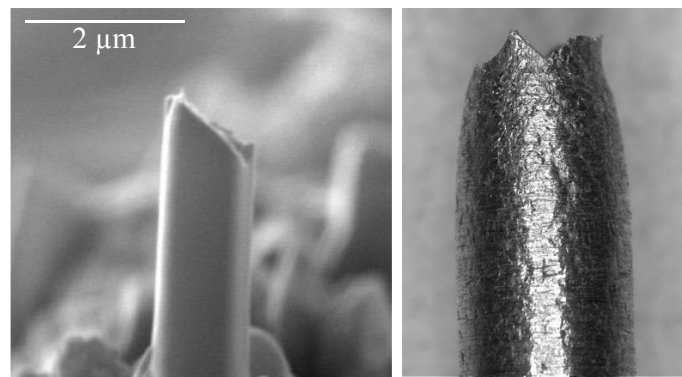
A fracture surface of a micro-tensile specimen showing a shear failure.
